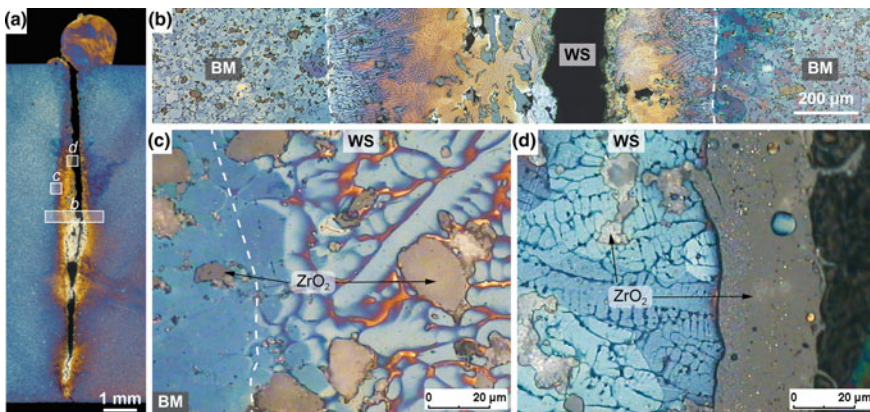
Light optical micrographs of a representative welding seam ($I_B = 15$ mA, $v_s = 5$ mm/s). a Macroscopic view; b enlarged section of the joint; c transition zone between BM and WS; d transition zone between WS and the cavity. Dashed lines mark the melting line
